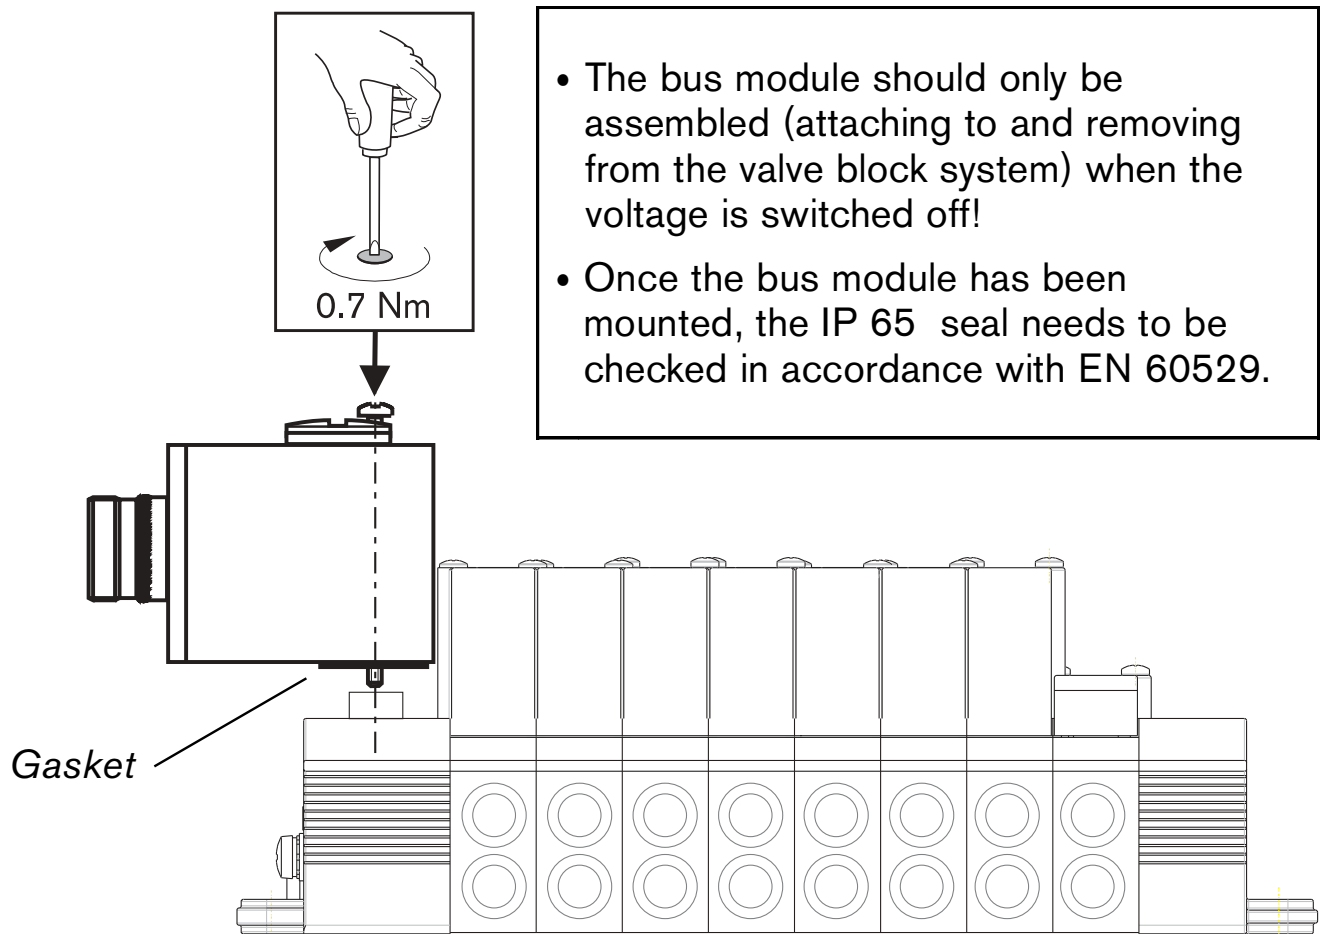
Bus module mounting on the valve block system's multiple plug connector
